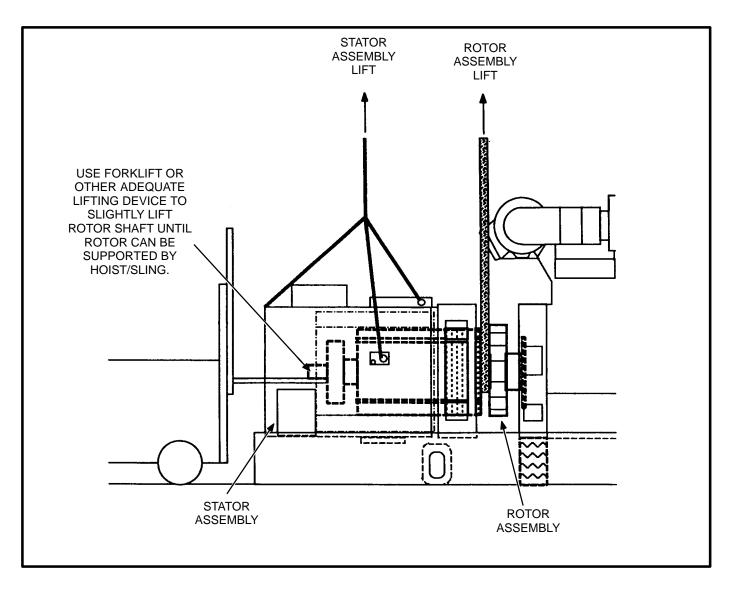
REMOVING STATOR ASSEMBLY
